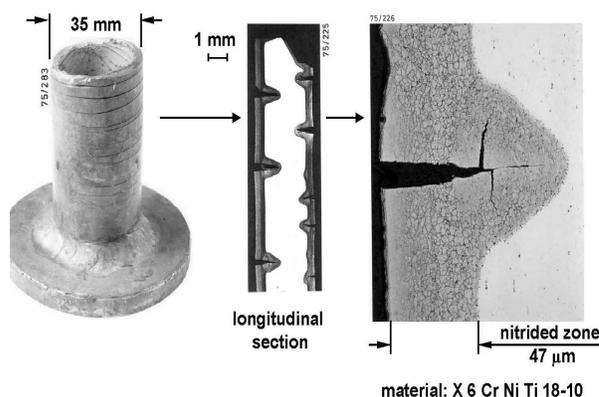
Fracture of a Thermowell Tube due to Nitriding
